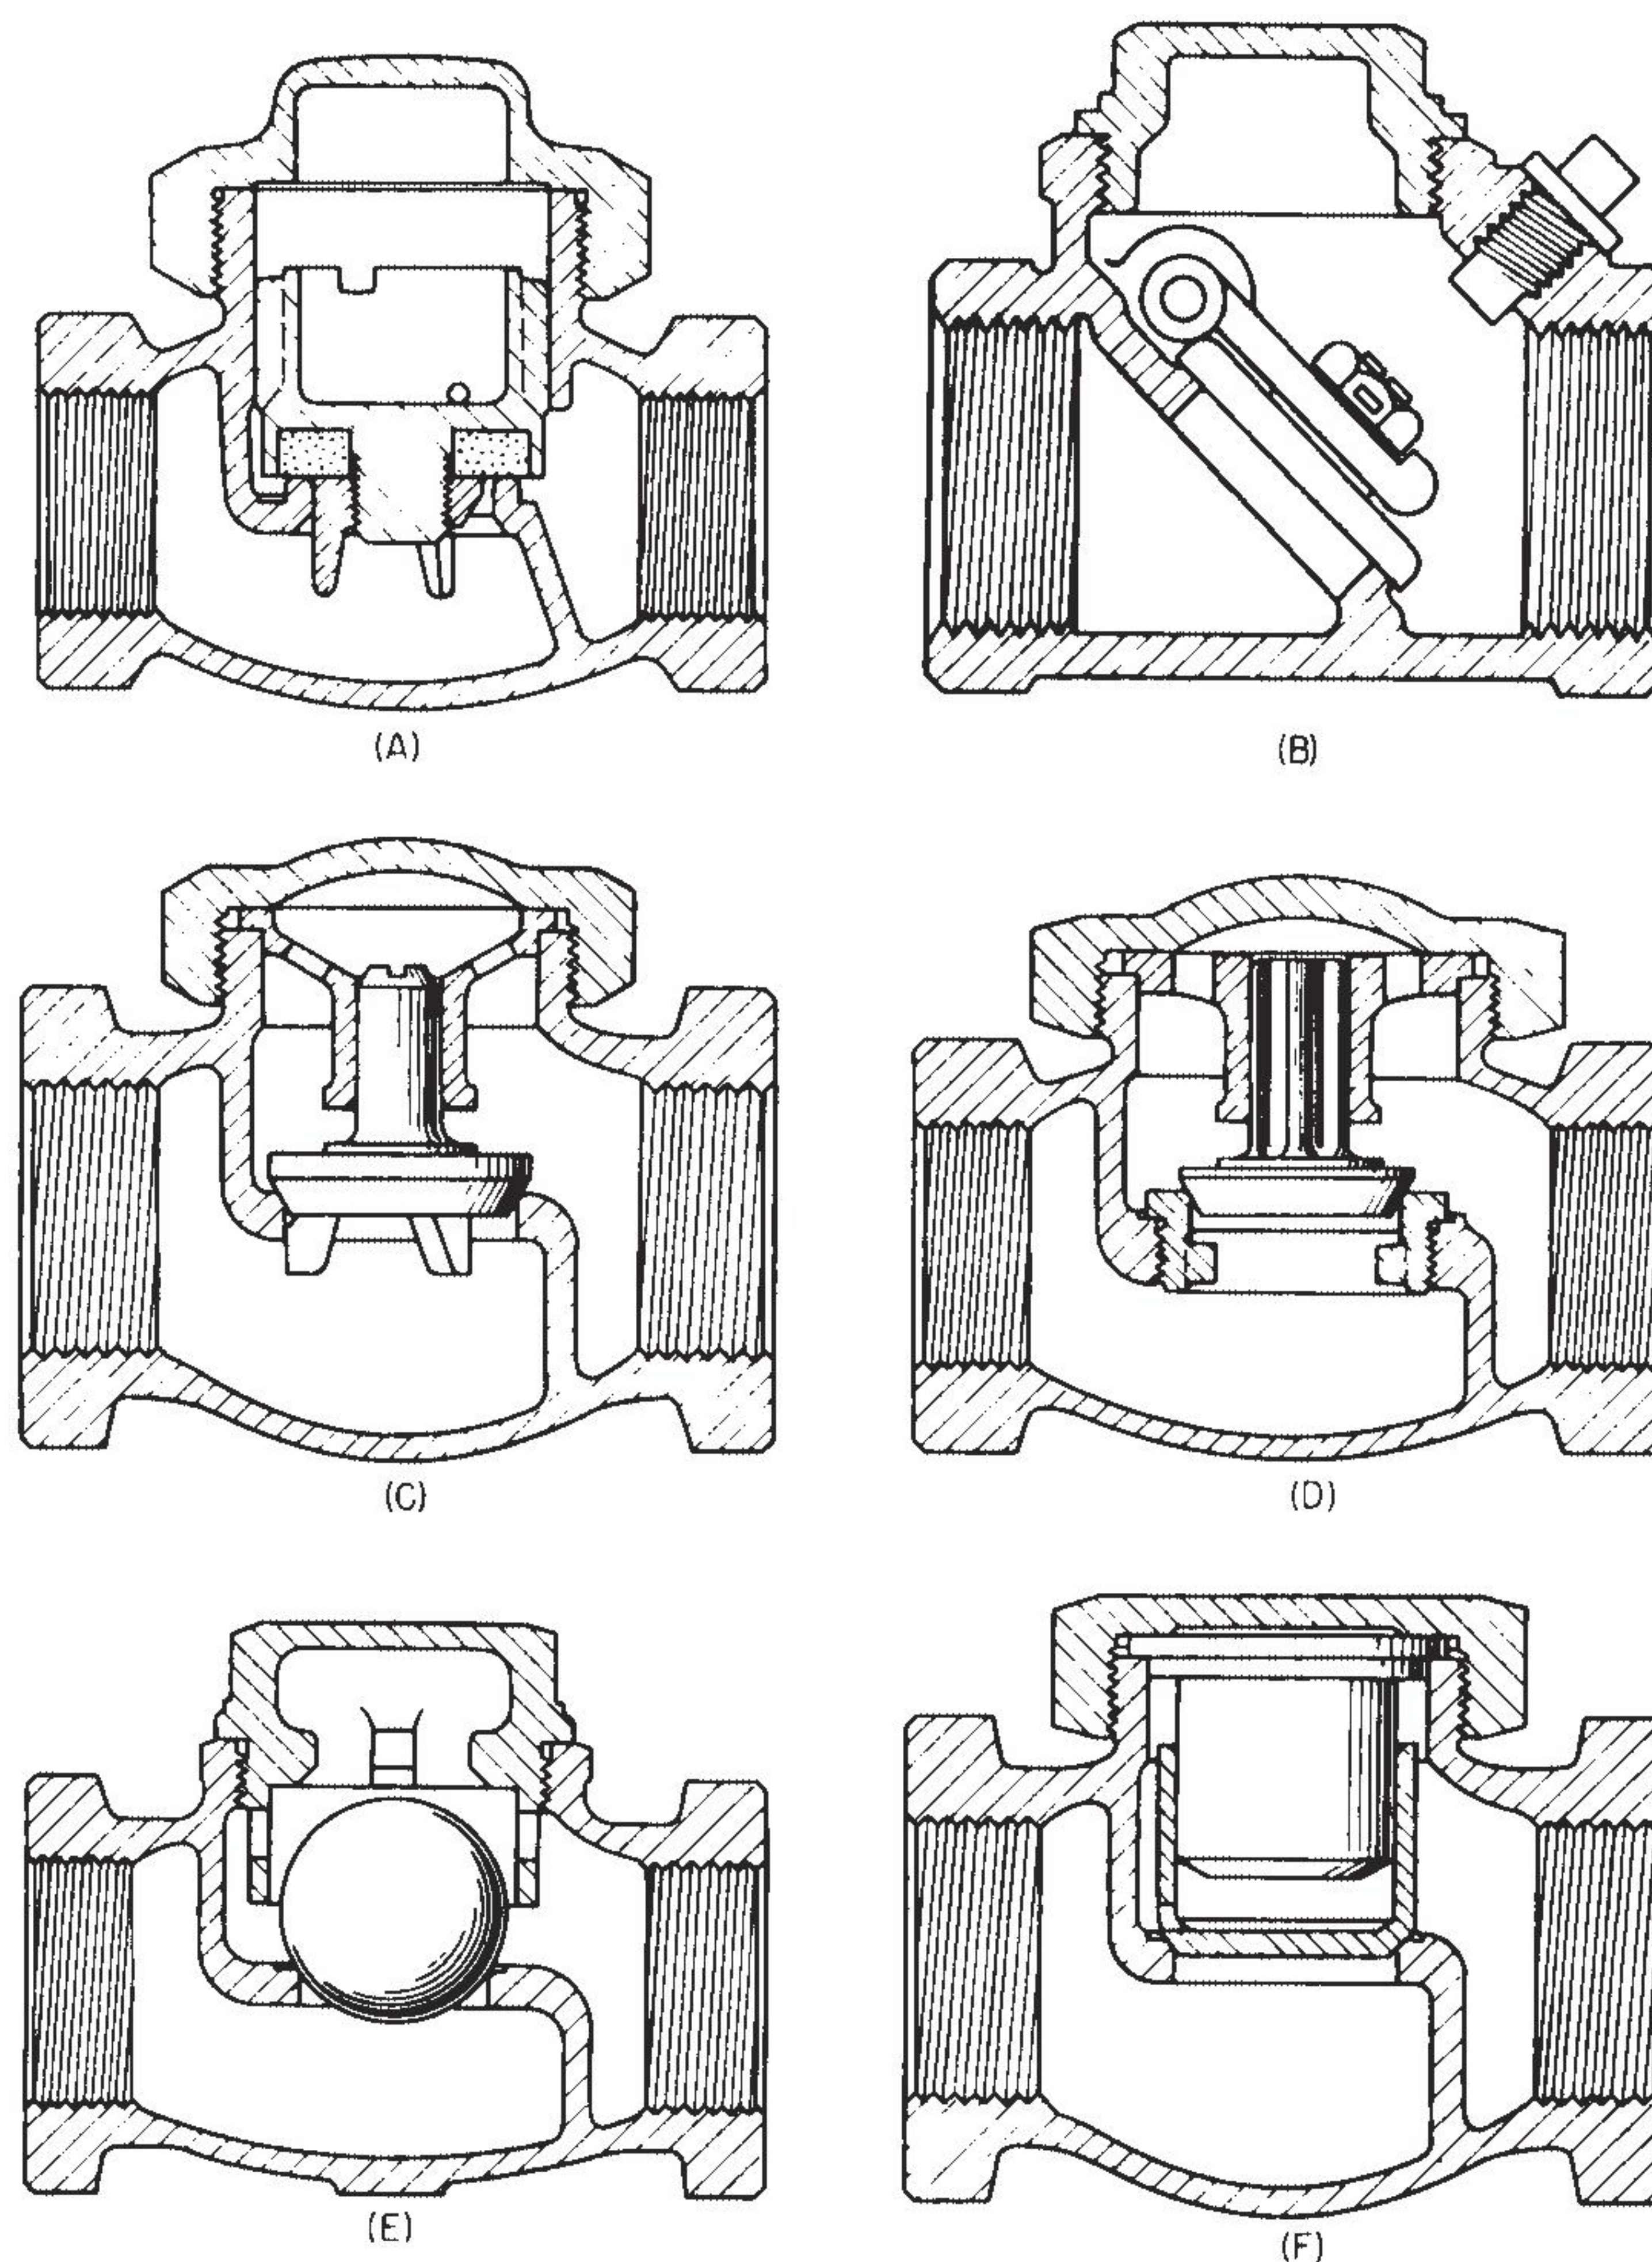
Bronze check valves. *A.* N-M-D lift-check nonmetallic disk. *B.* Swing-check regrinding seat. *C.* Lift-check regrinding seat. *D.* Lift-check renewable seat. *E.* Ball check. *F.* Air-compressor check.
